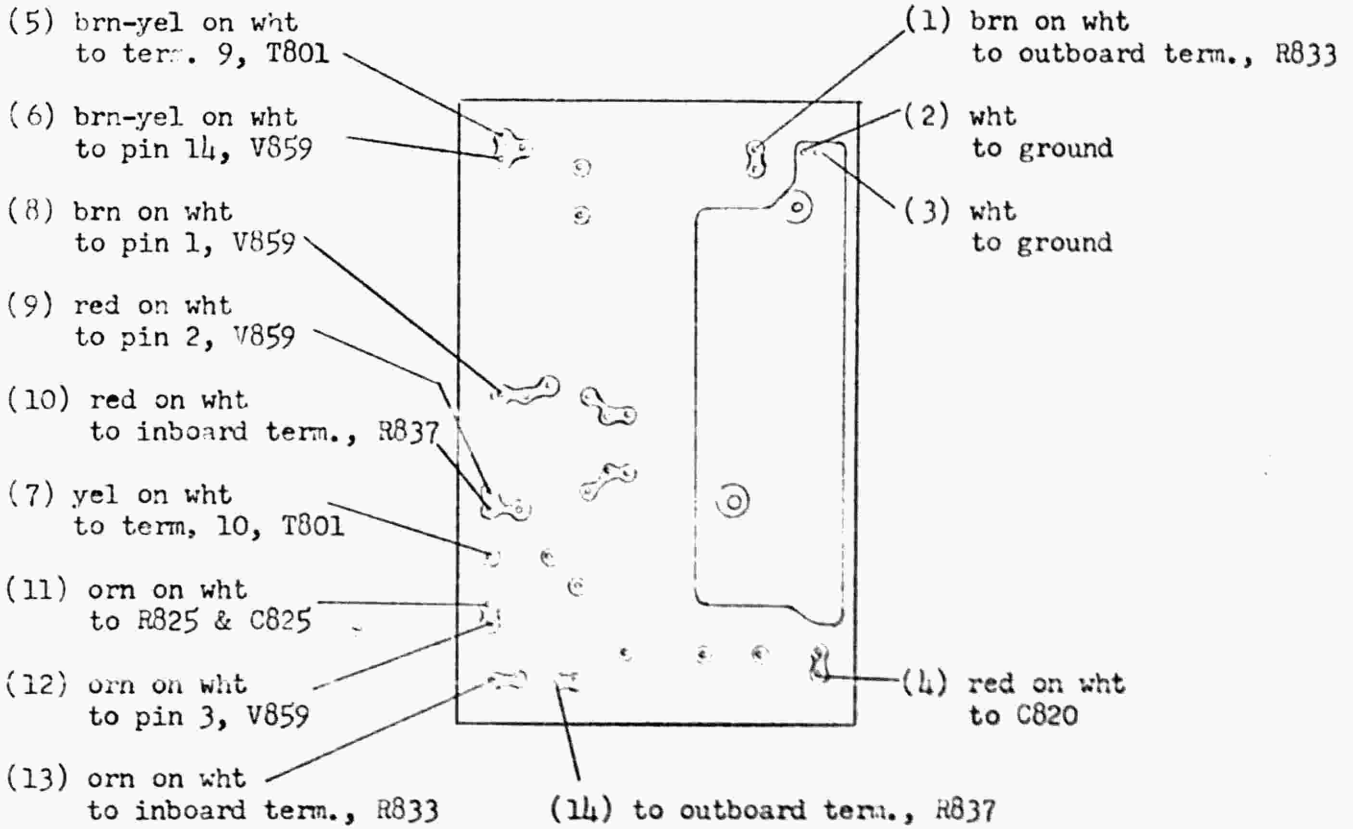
OLD ASSEMBLY, PN 670-0411-00
